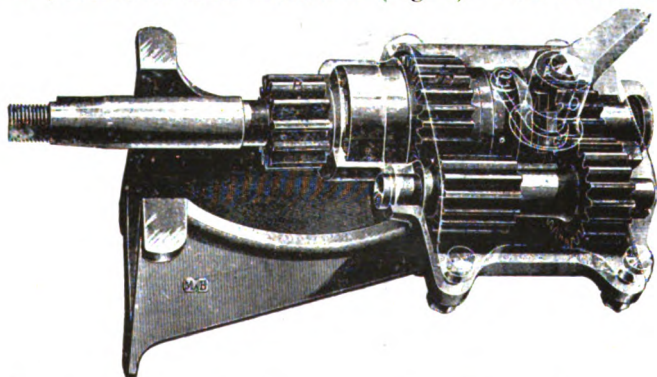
VIEW OF GEAR-BOX WITH COVER PARTLY REMOVED.
